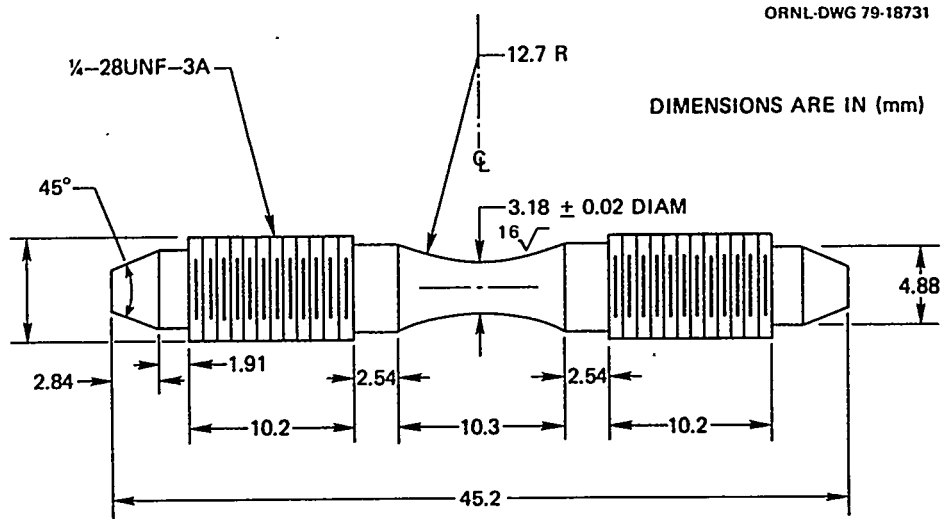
Miniature hourglass fatigue specimen employed in fatigue testing. Dimensions are in millimeters.
